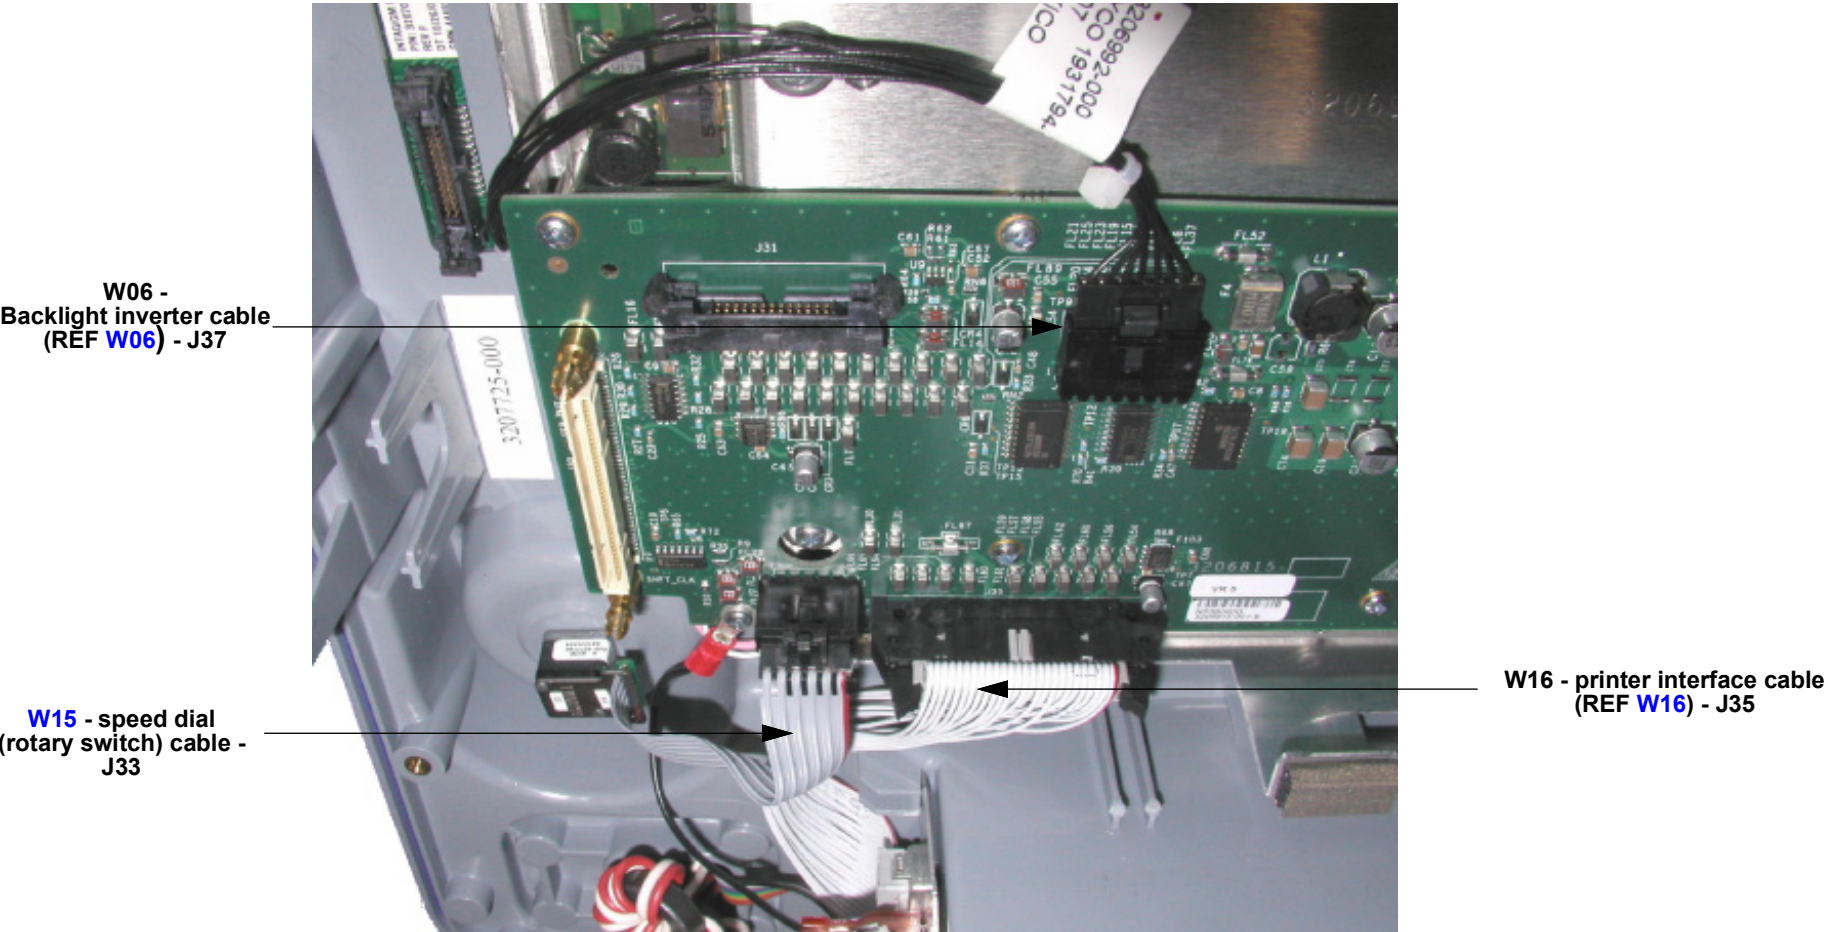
Interface PCB cable connection locations - view 2 of 2
